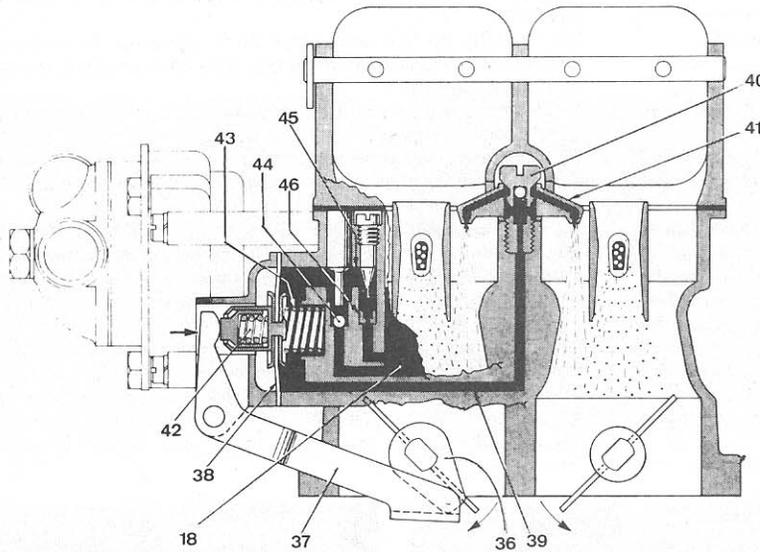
Carburettor acceleration phase (Sec 3)
